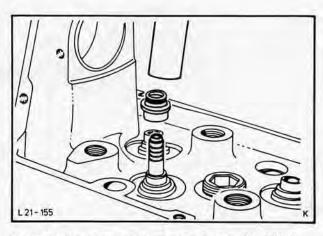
Fit valve stem seal, using Special Tool 21–007, 'B' engine
